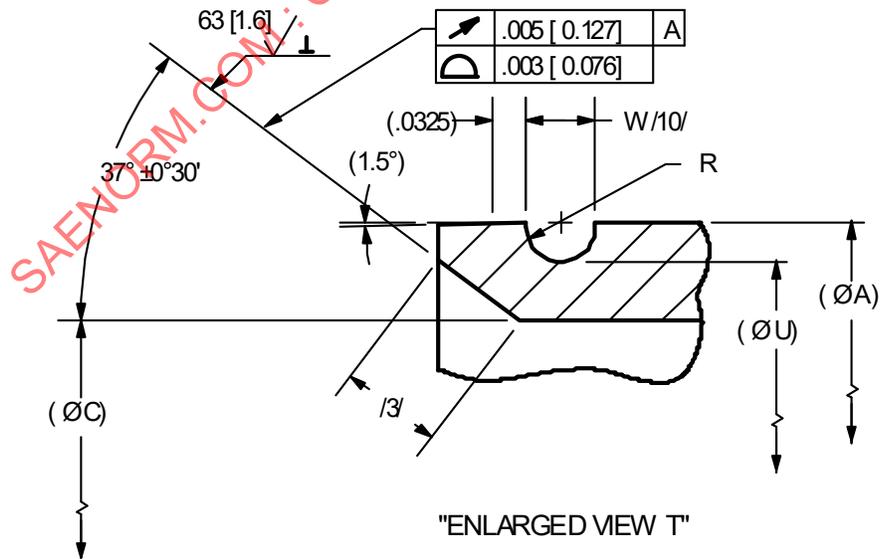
FITTING END DESIGN, STYLE E /11/
